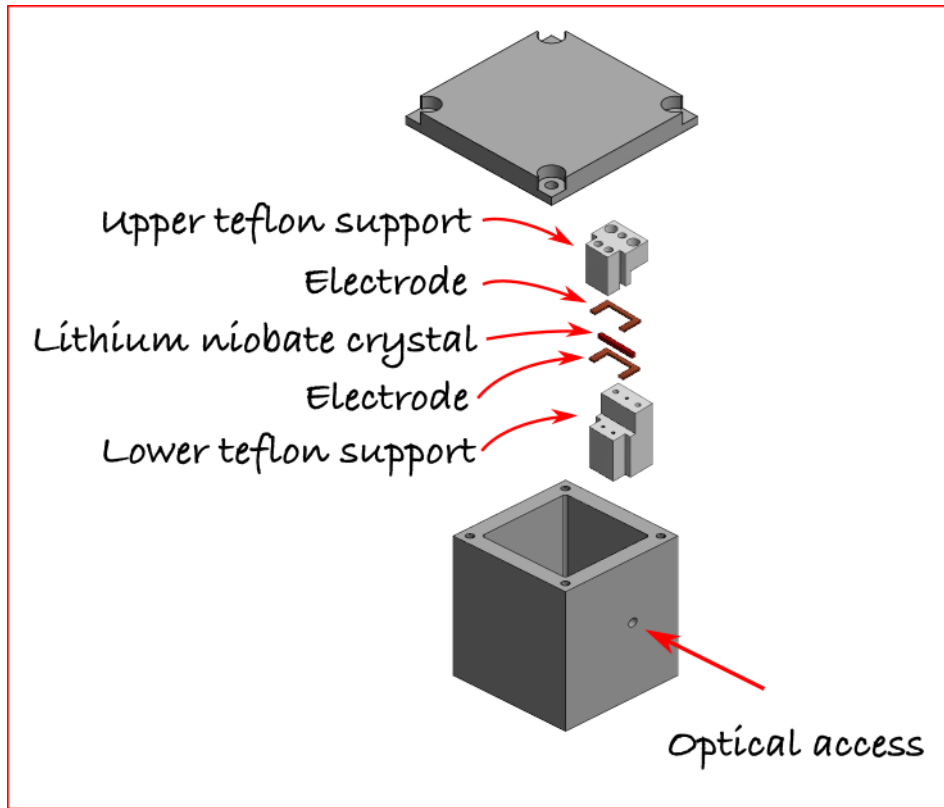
Exploded rendering of the mechanical parts that compose the EOM. The transformer, wound in air, is not shown.
